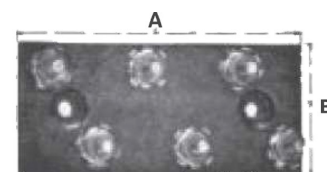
6-point terminal board, Type EB-4, Cat. 2860351G3
